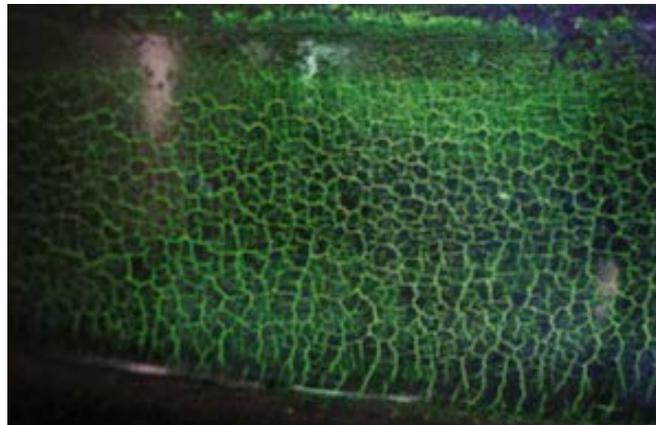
Typical appearance of thermal shock cracks on the surface of a HPDC die during magnetic particle inspection.
